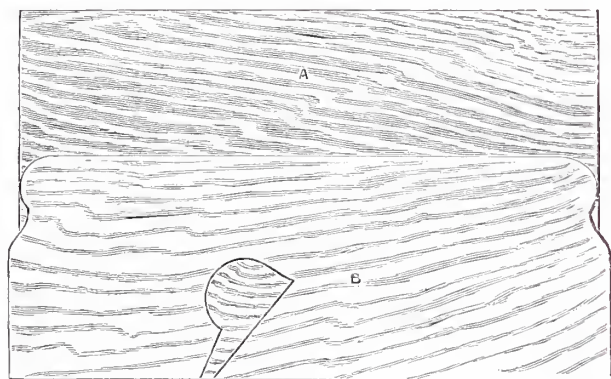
Pattern of Iron Rebate Plane: Elevation.
